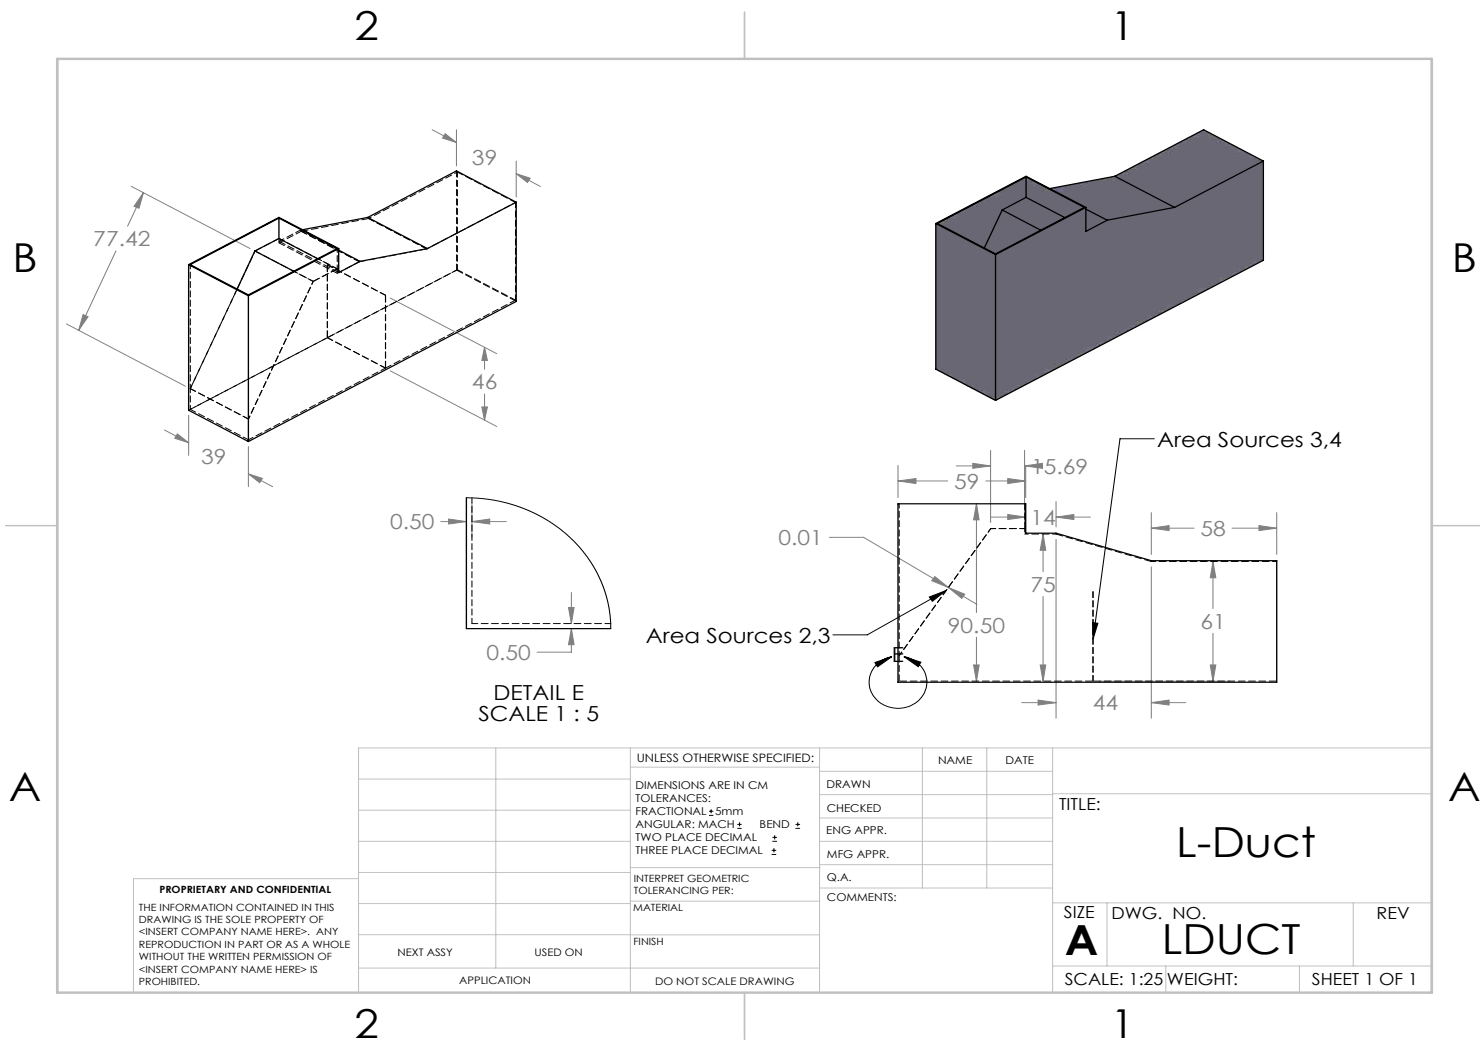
Drawing of the L-duct fixture with the appropriate dimensions.
